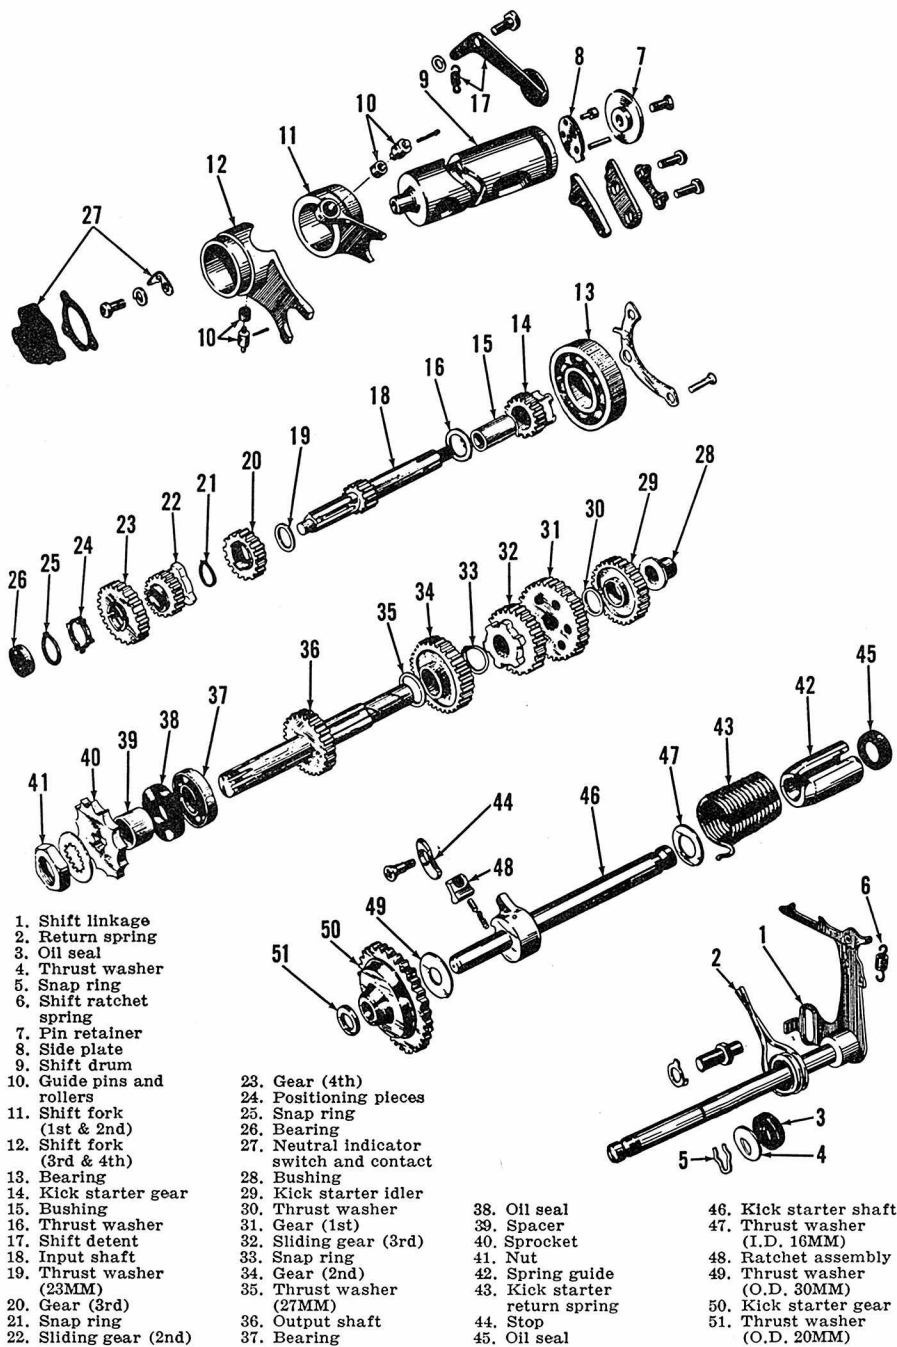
Exploded view of the transmission used on B100-P and B105-P models. Kick starter and shifter assembly are similar on TC120 models.
